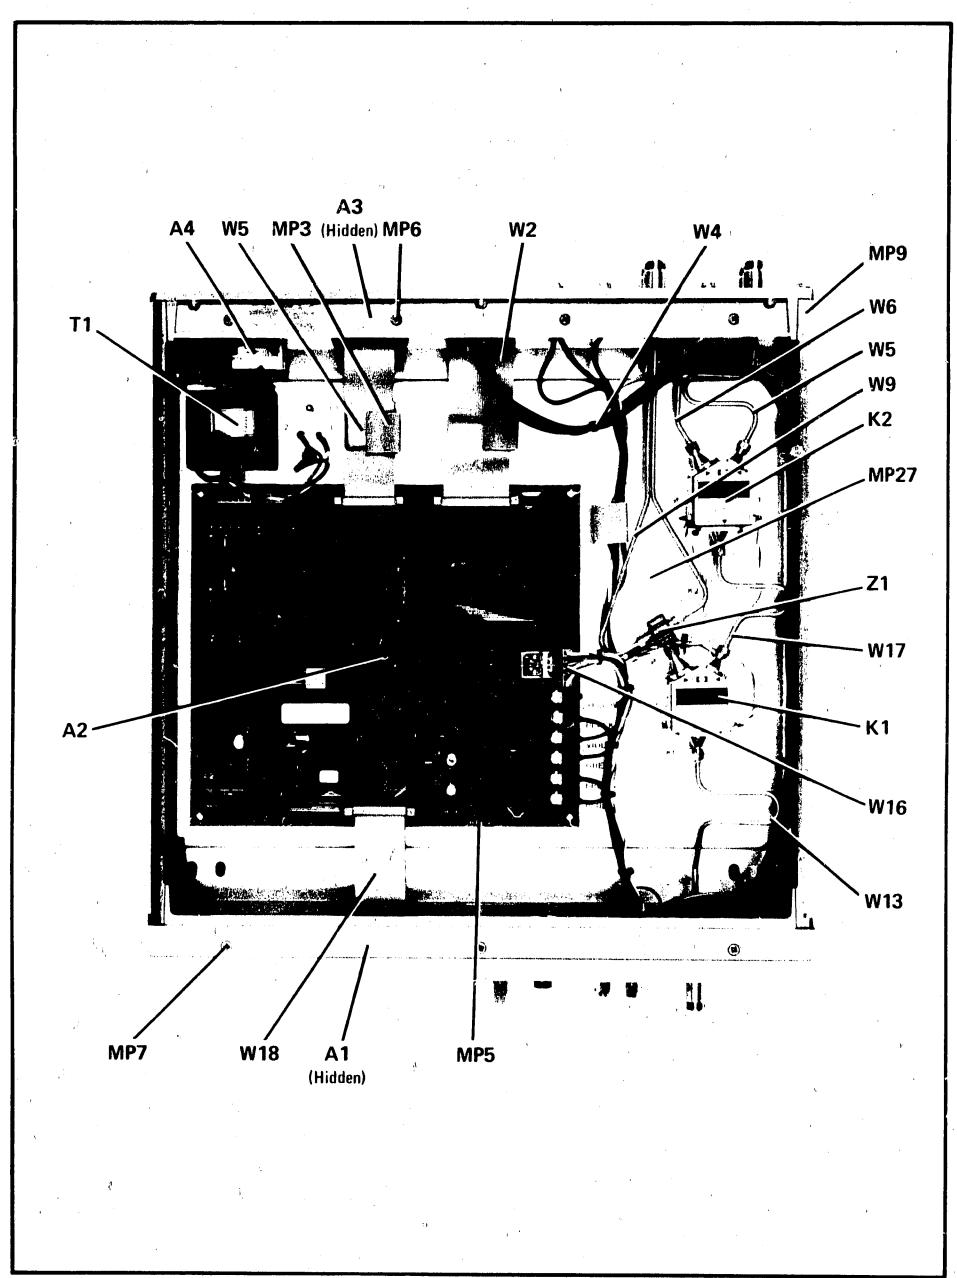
Top Chassis Parts, Mechanical Parts, Cables, and Assembly Identification
